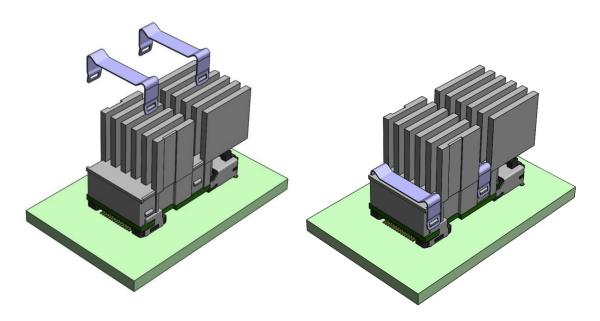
Heat Sink Attachment by Heat Spring Clip
